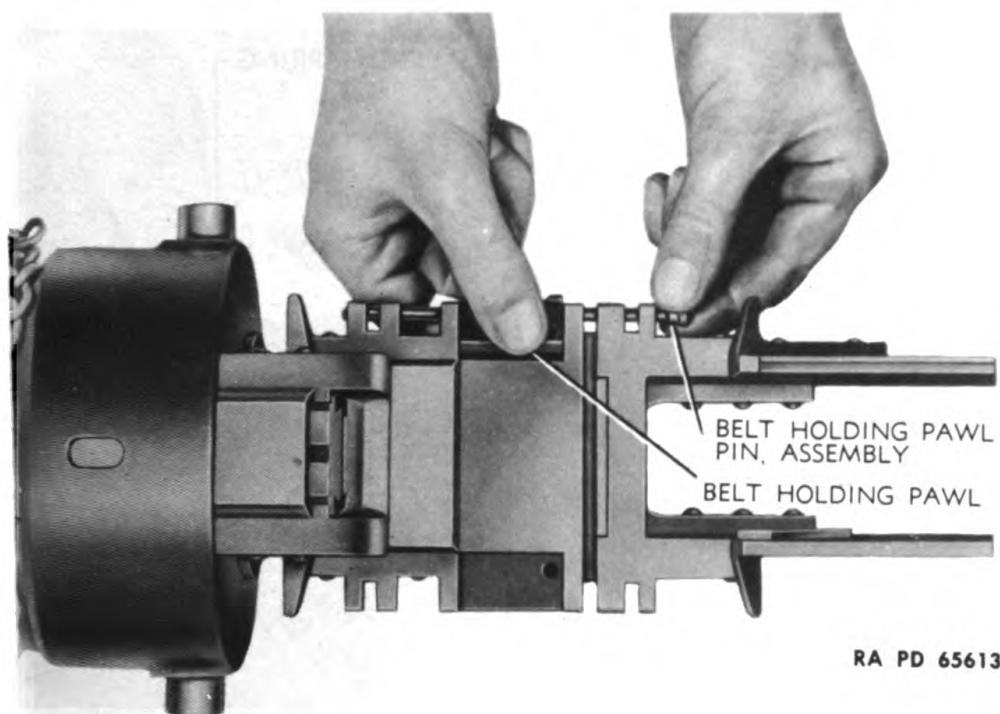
Removing Belt Holding Pawl — (Pawl Shown Here Is Assembled for Right-hand Feeding)
